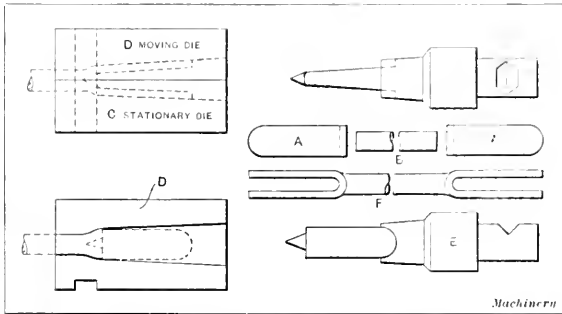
Illustrations showing Sequence of Operations in the Butt-welding of Bottom Connecting-rods, shown in Fig. 78
